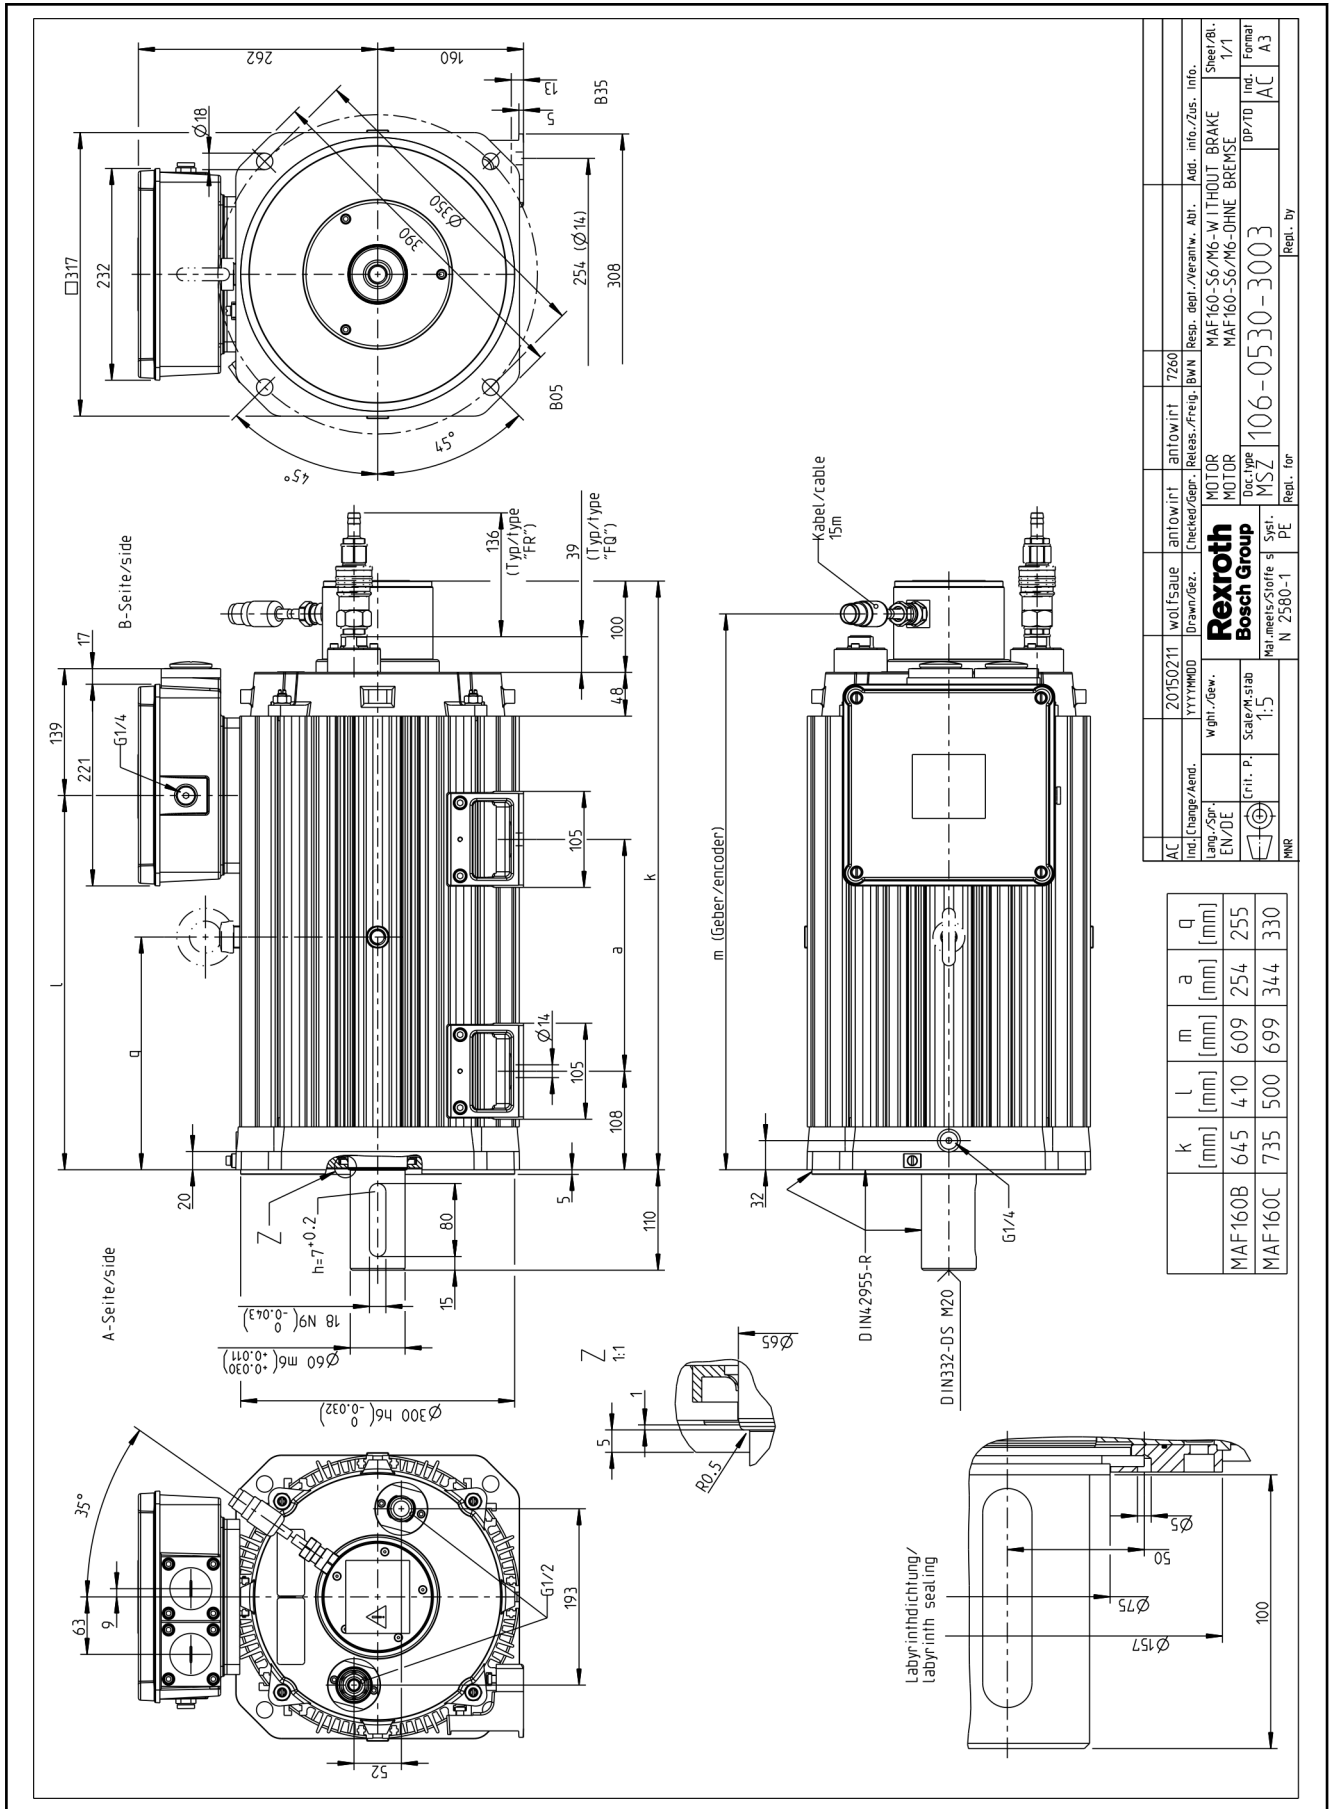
MAF160 with M6/S6 encoder, without brake
